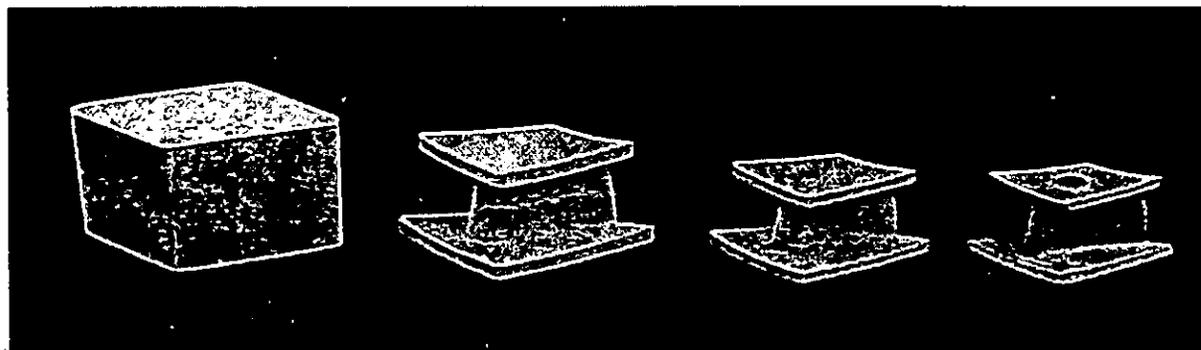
Manufacturing Steps For Ceramic Turbine Nozzles. (L to R) (a) Molded Blank; (b) Presinter Machined Blank; (c) Densified Blank; (d) Nozzle After Final Grinding. (CC Photo).
